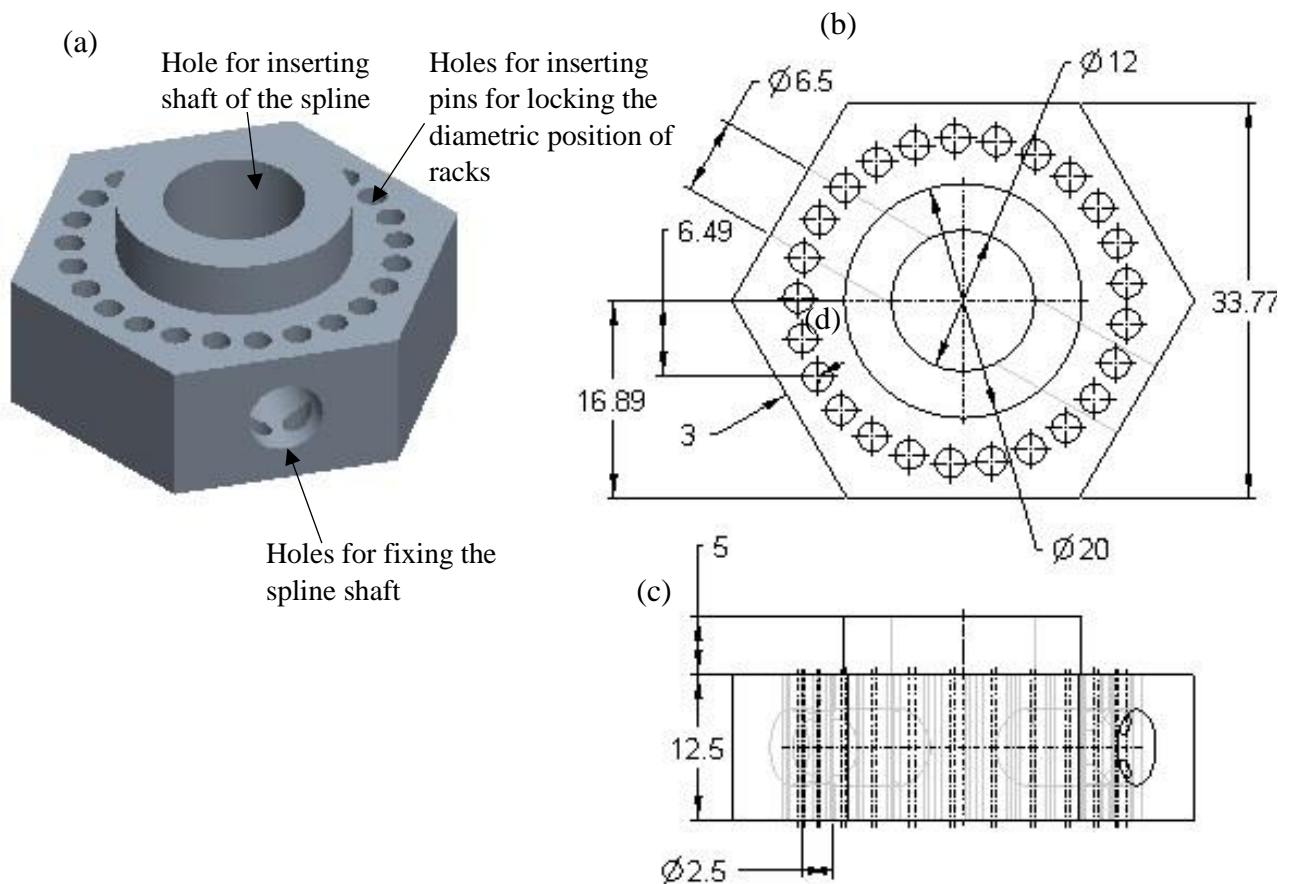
(a) 3-D view, (b) top view, (c) projected front view of the CAD model of nut for rotating the spline in the in-situ MRH tool.
